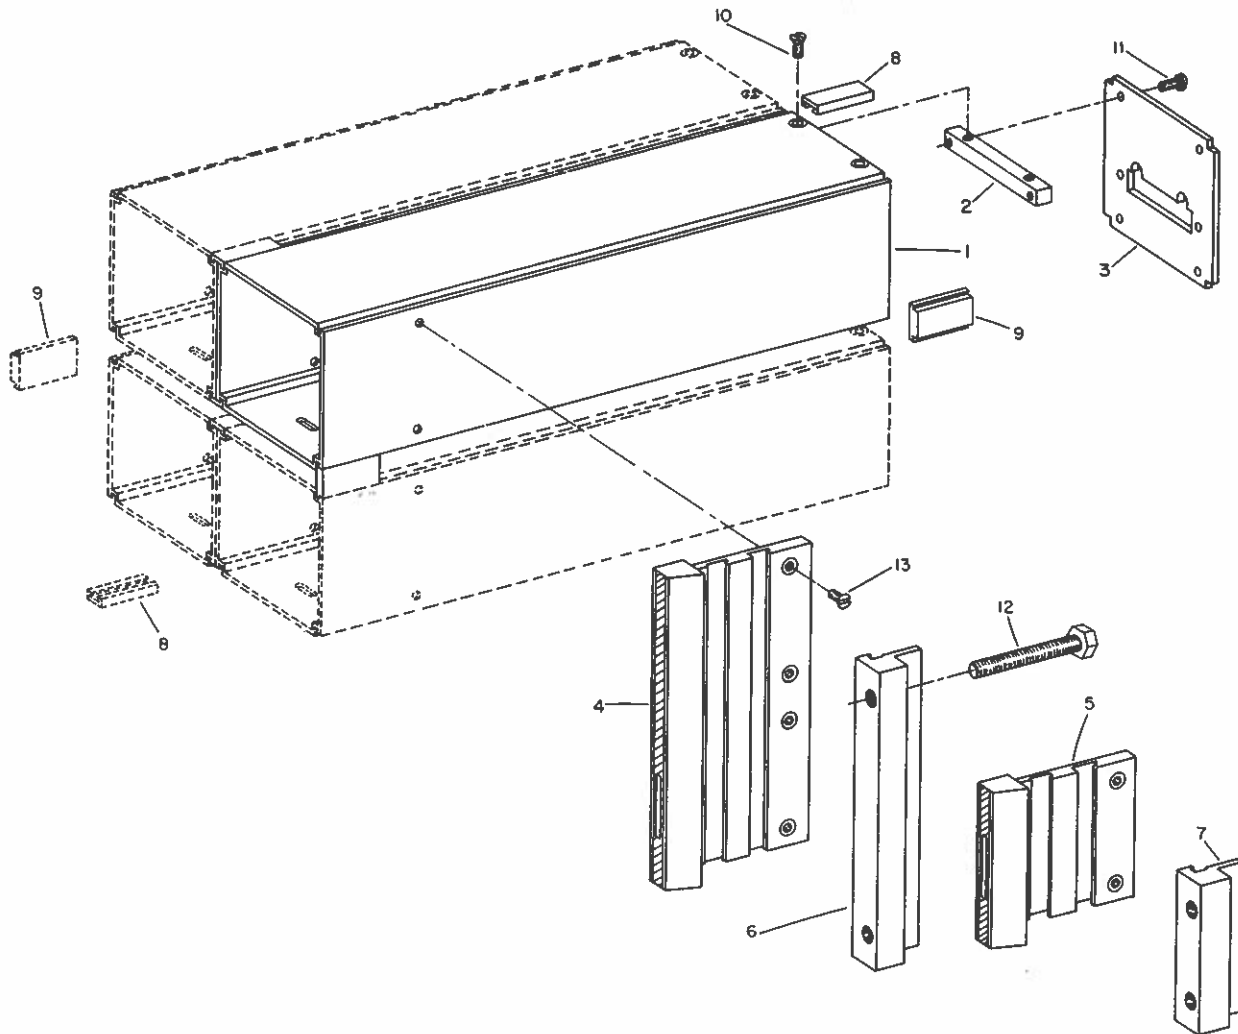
Parts Drawing E91-10-6, Type TO10 Blank Station
